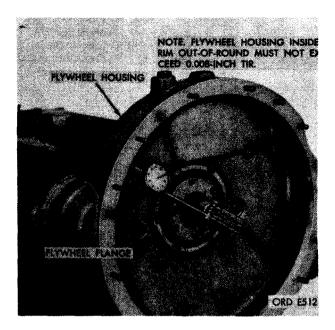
CHECKING FLYWHEEL HOUSING FACE RUNOUT USING DIAL INDICATOR.
